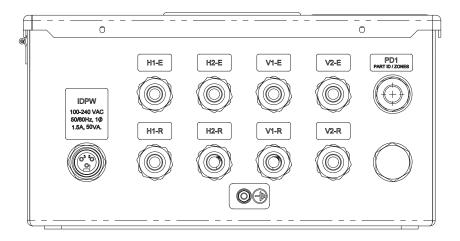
Beam Array Sensor Cable Entrance to Junction Box (outside bottom view)
